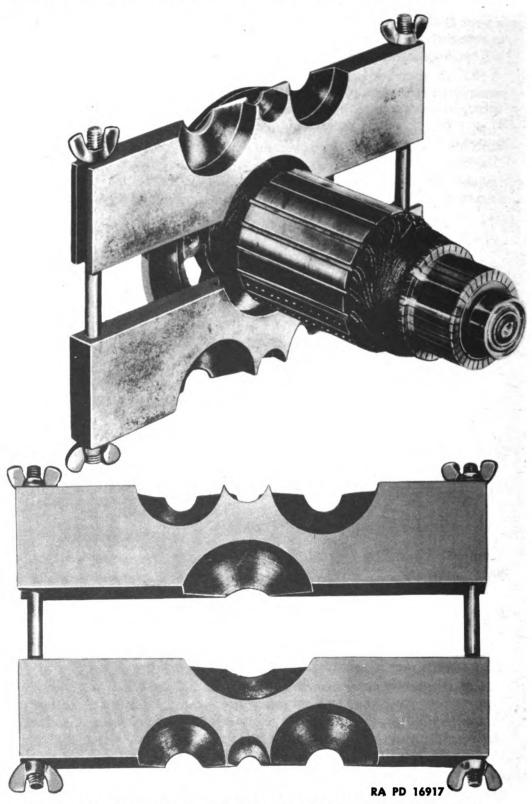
Armature with Arbor Press Plate in Position for Bearing Removal
